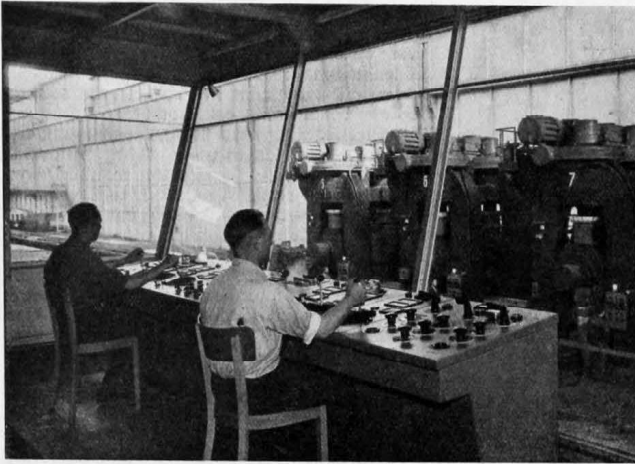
Control cabin of finishing stands (Nos. 5-10) of wide strip hot rolling mill
